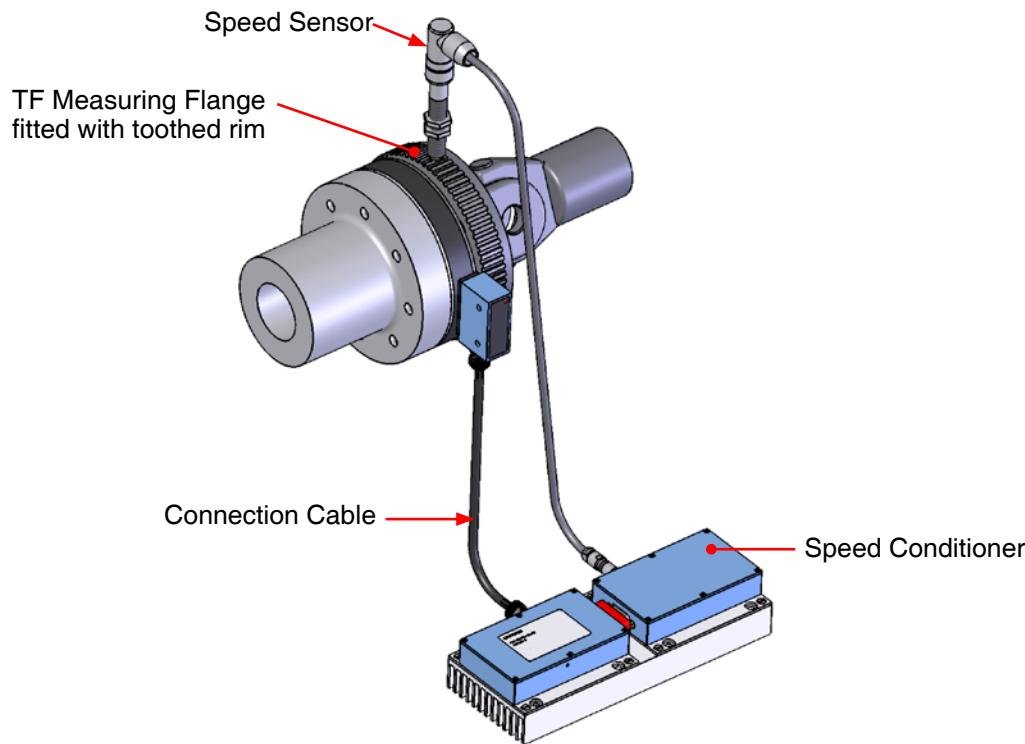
Mounted TF Torque Flange Sensor with Speed Measurement Option
